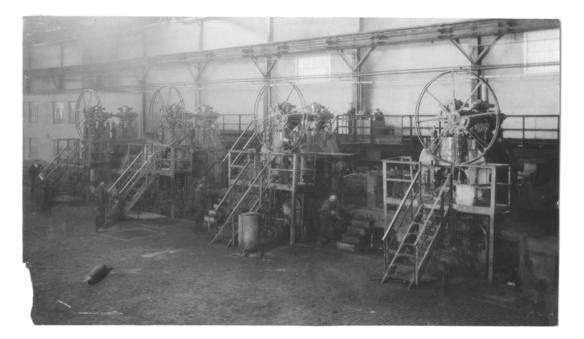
The continuous wide hot strip mill finishing train of Columbia Steel, Butler, Pennsylvania with United Engineering and Foundry Company four high stands and Messinger roller bearings – Townsend and Naugle appear to be standing on the extreme left of the picture (courtesy of the Hagley Museum and Library, Delaware)
